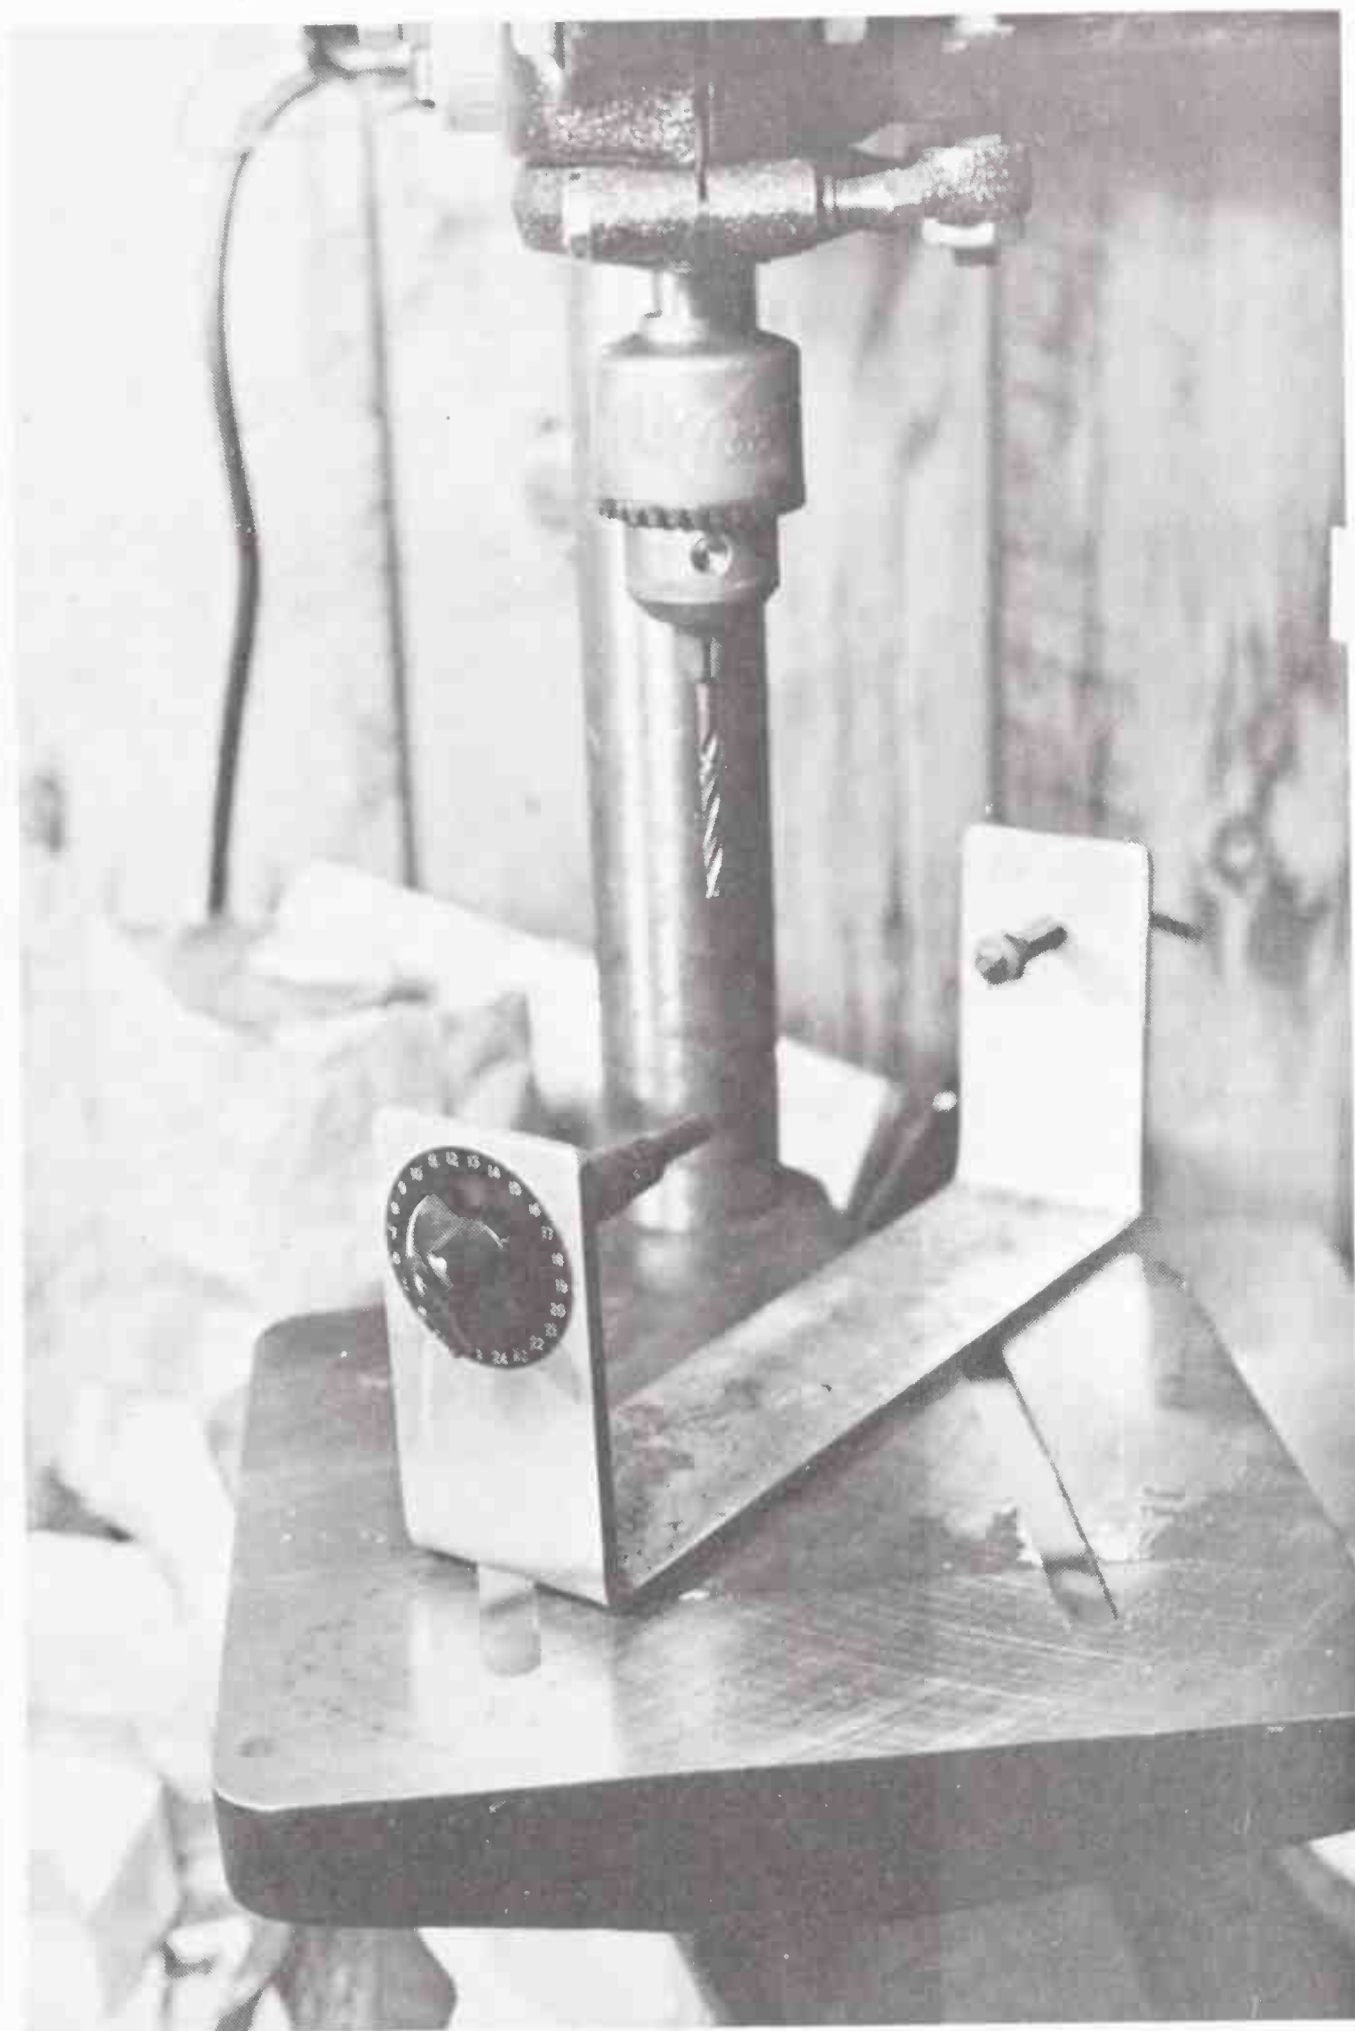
B-Square-brand jewelers' fixture used in conjunction with the drill press to jewel bolts and other metal parts.
